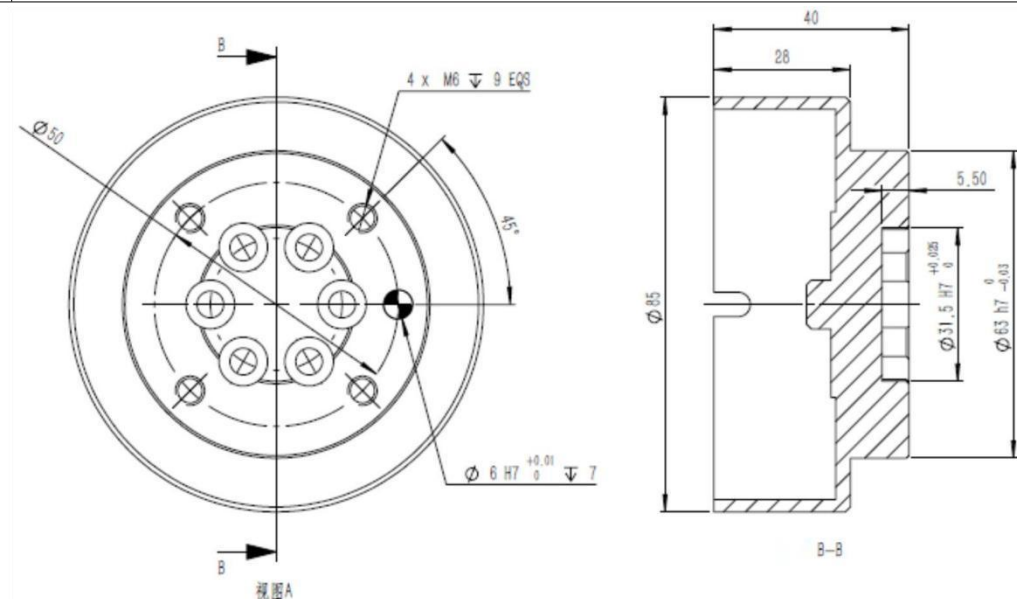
End flange dimensions of H10-1500 and H16-1200
